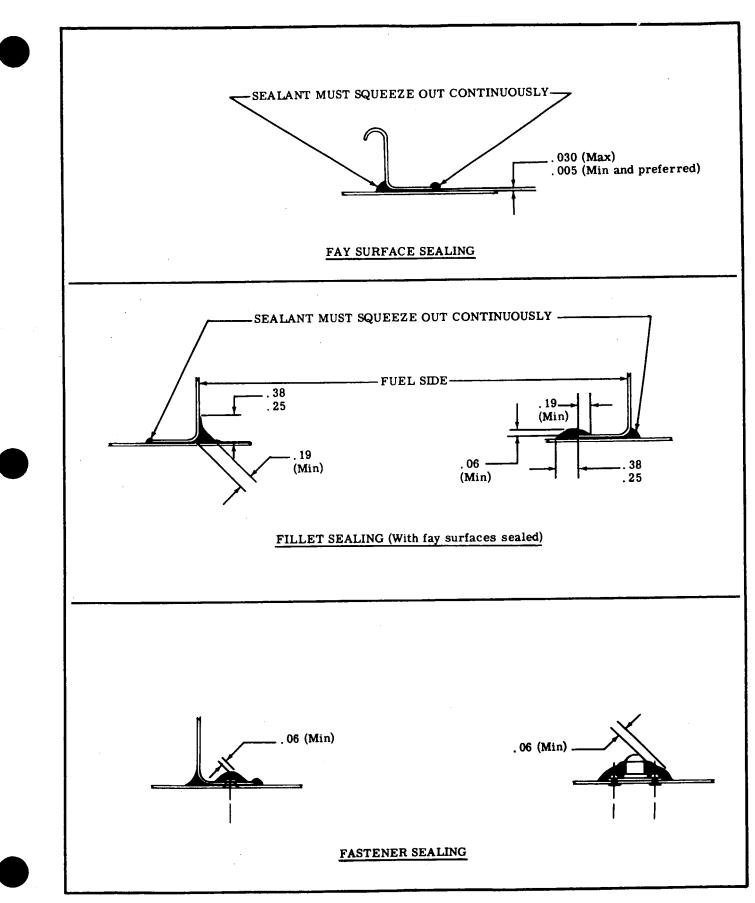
Typical Fuel Bay Sealing (Sheet 2 of 2).
